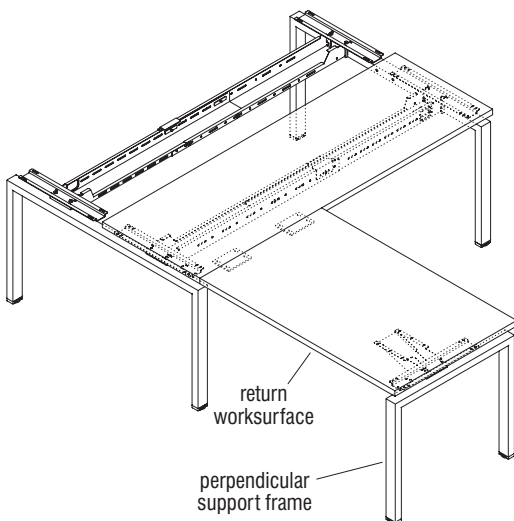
Dual-Sided Fixed, Return Worksurface to Standard Rectangular
